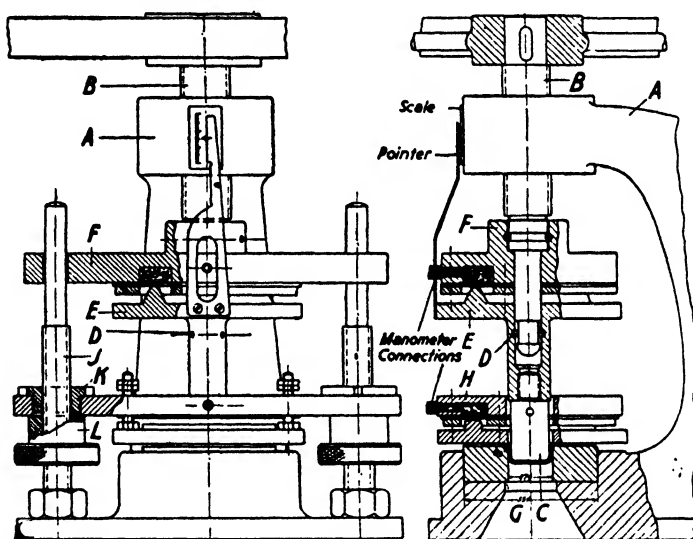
Part-sectional front and side elevations of A.E.G. cupping machine.
